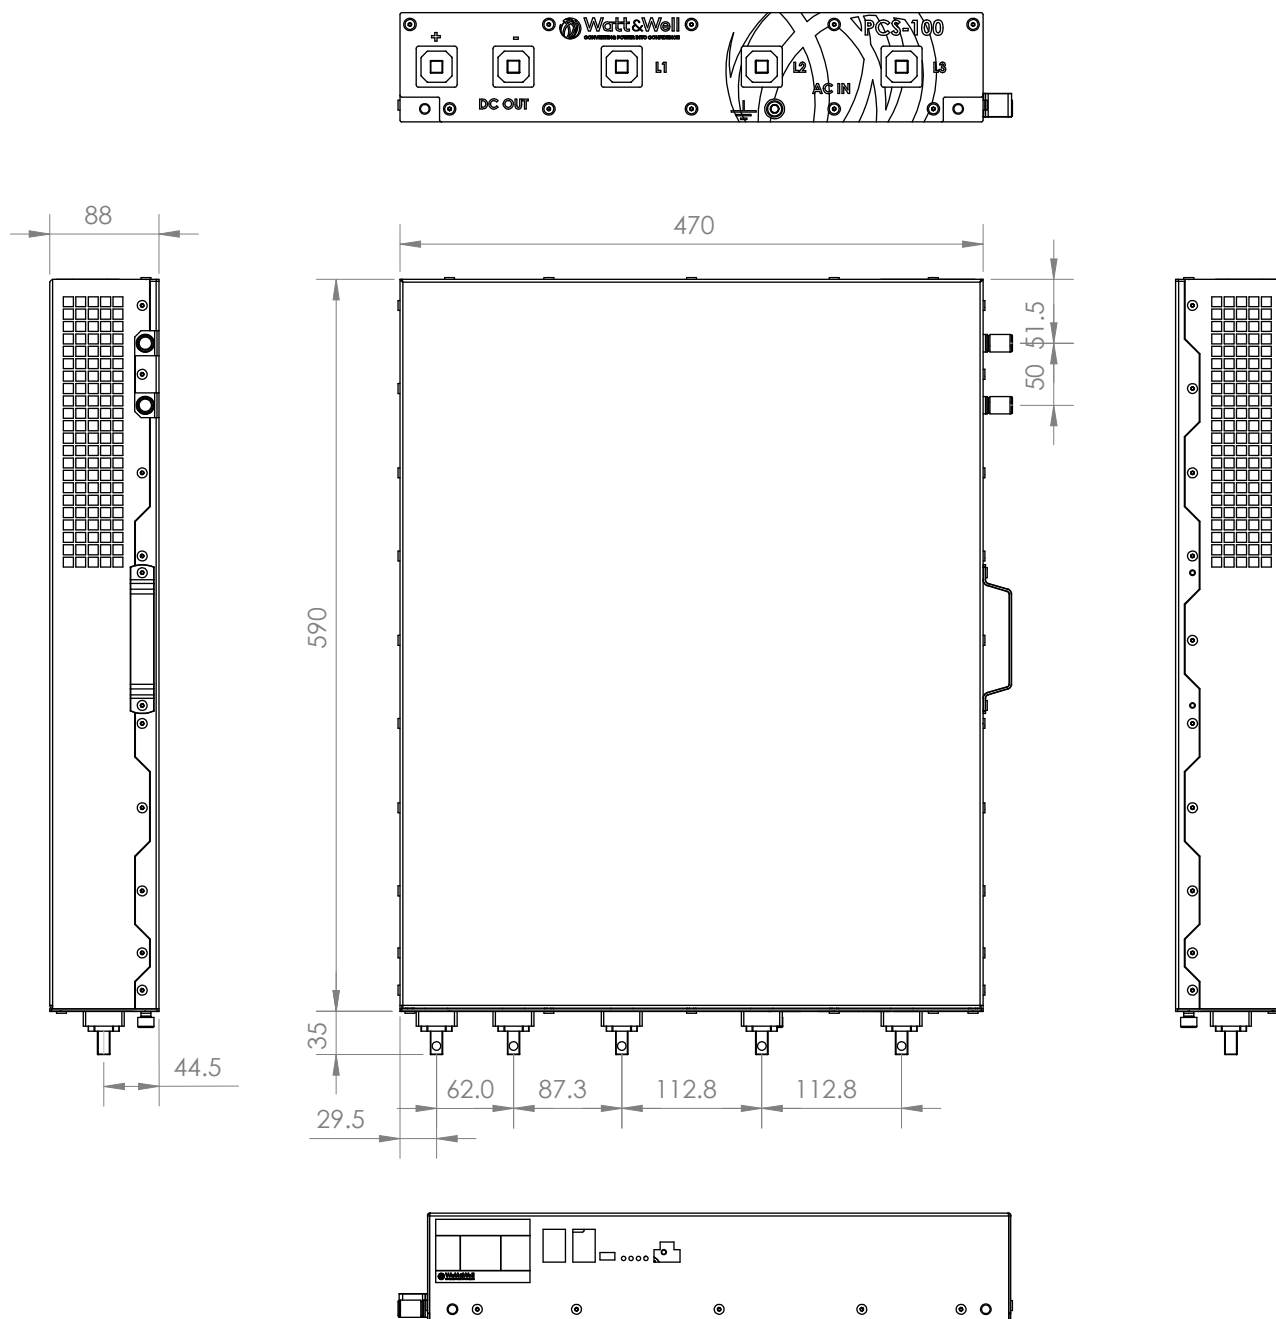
Dimensions of the PCS-100-LS (single version)
